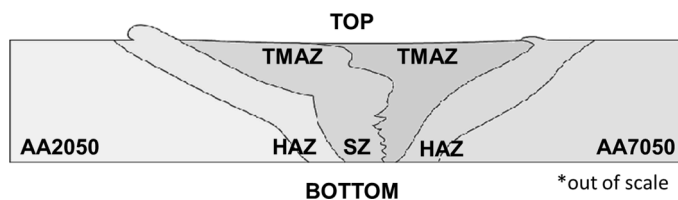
Schematic drawing showing the weld zones from a cross section of the alloys AA2050 and AA7050 welded by FSW.
